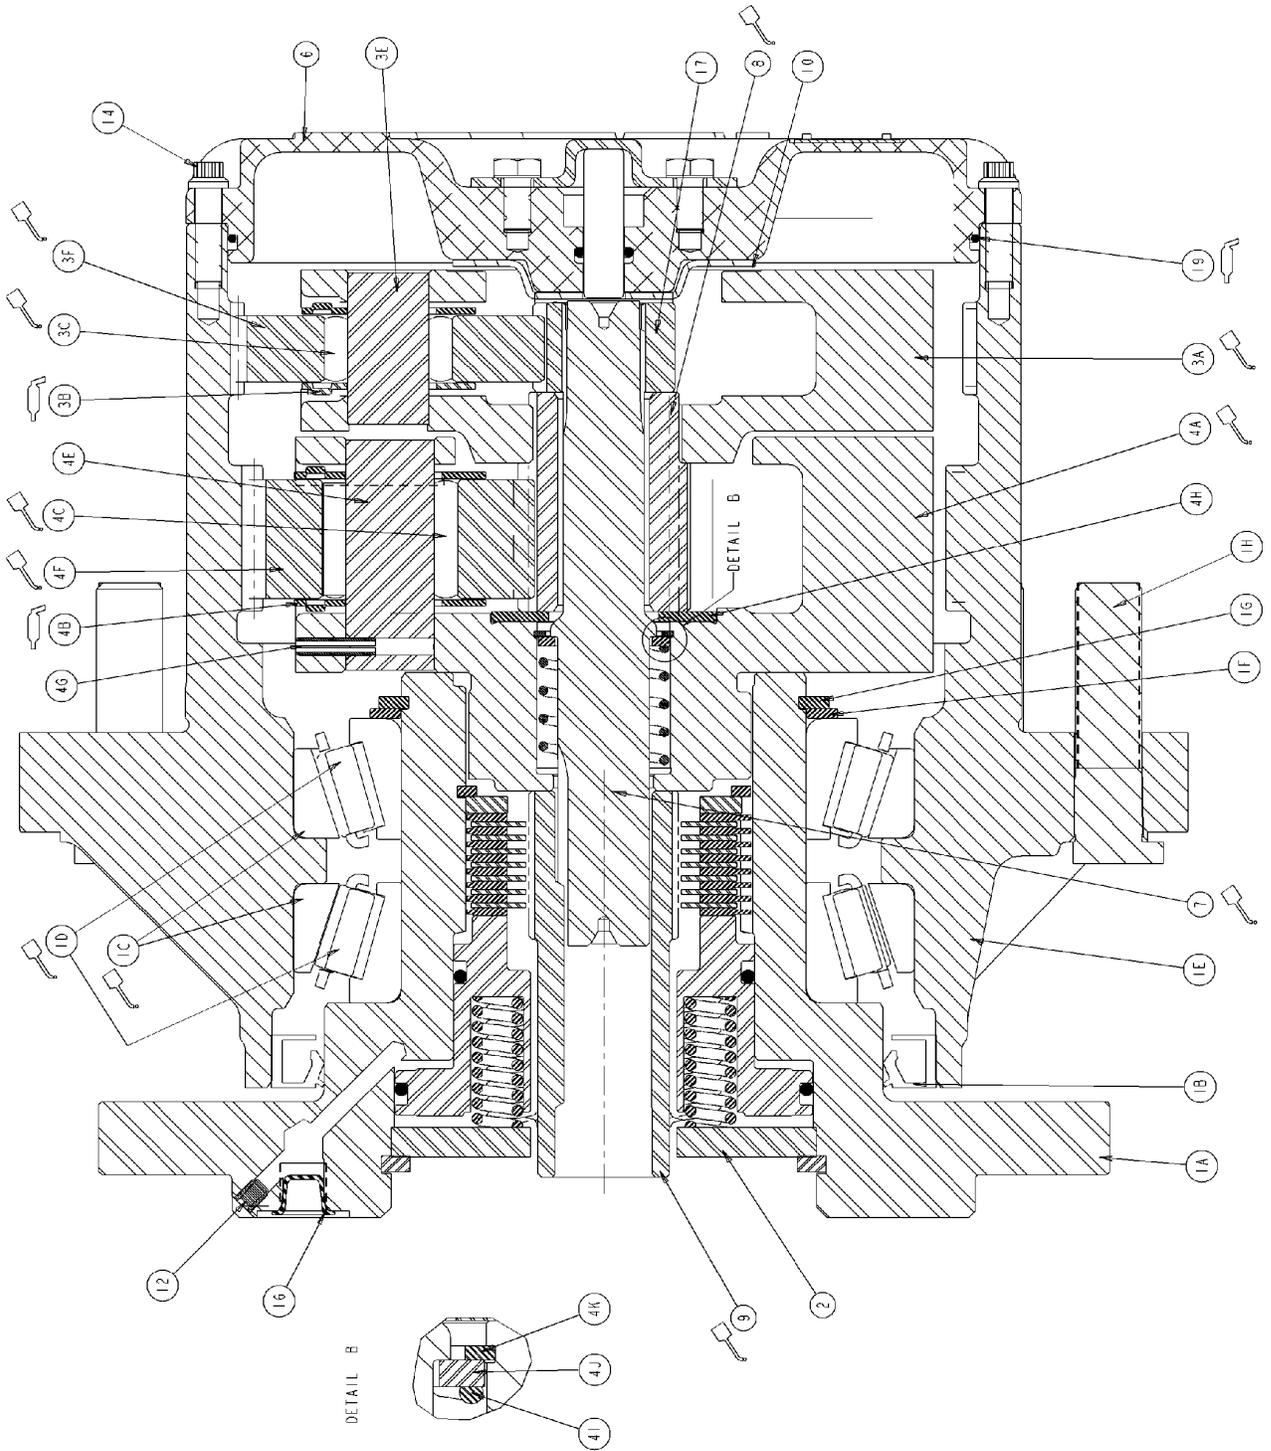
Assembly Drawing - With Integral Input Brake - Sheet 1 of 2
